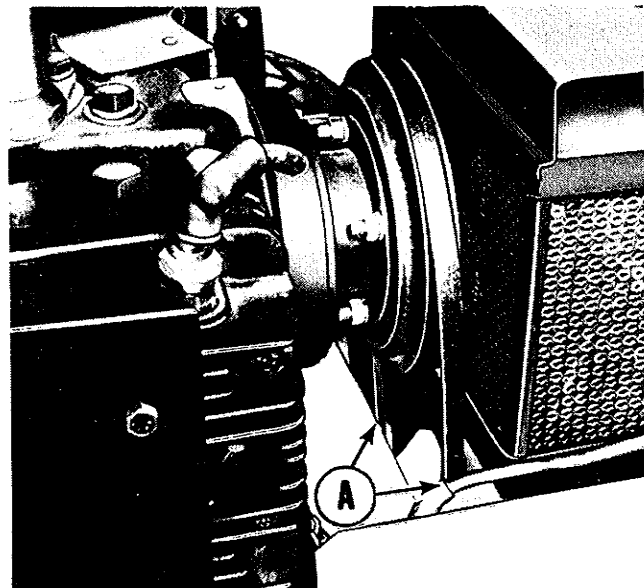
Tractor hood raised to show mower drive belt installed on power take off pulley.
